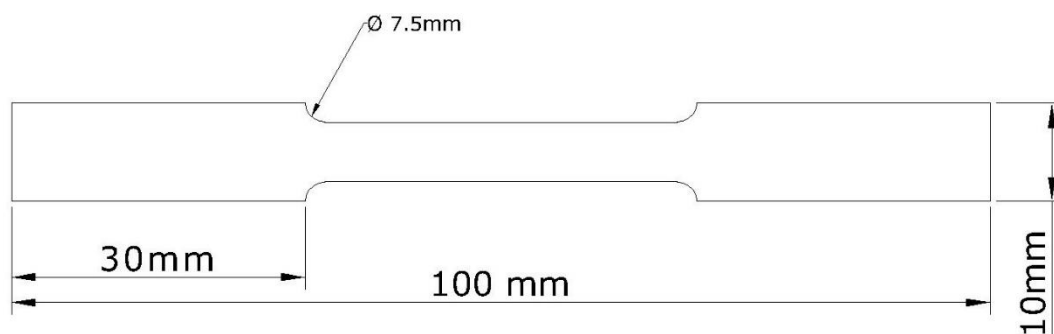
Dimension of Tensile welded specimen prepared by WEDM
